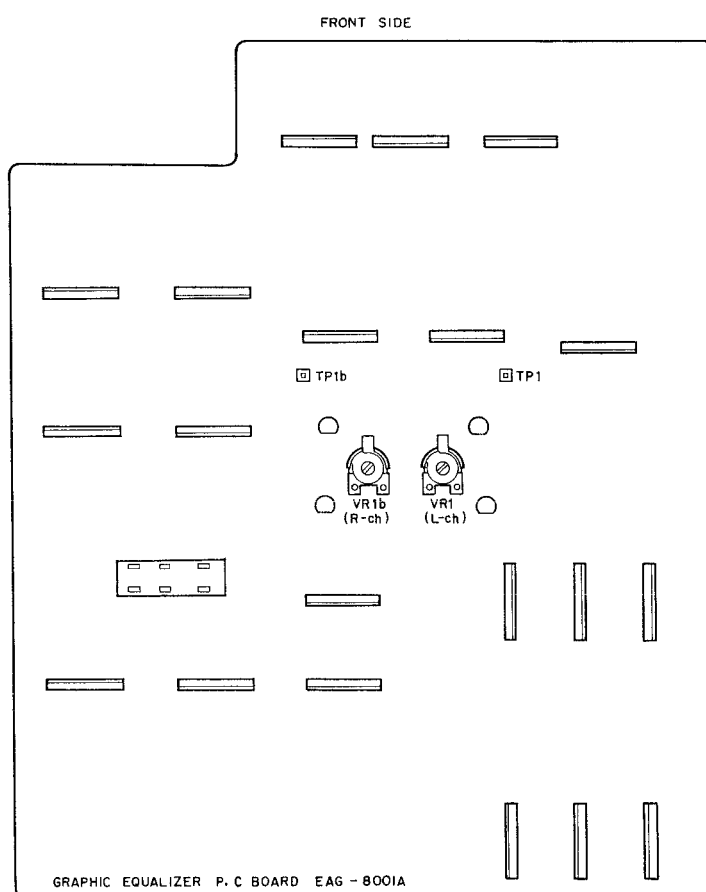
Graphic Equalizer P.C Board (EAG-8001A)
